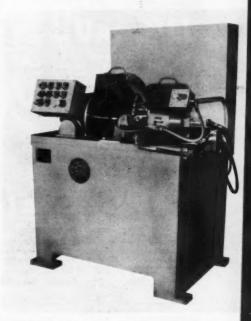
Roto-Flo Model 1026 Roller Burnisher strengthens automobile front-wheel spindles by coldworking the critical fillet.
